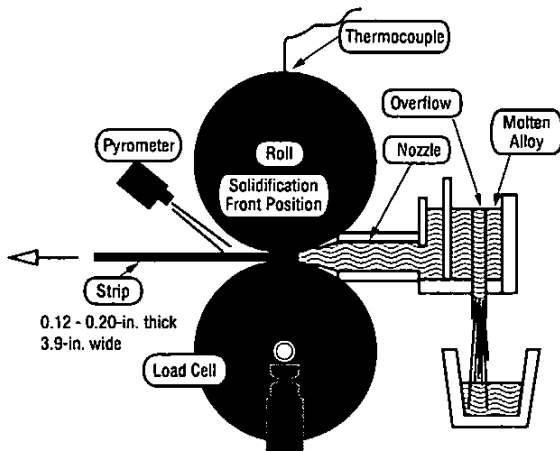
Schematic configuration of horizontal twin-roll strip caster (Ref. 43)
